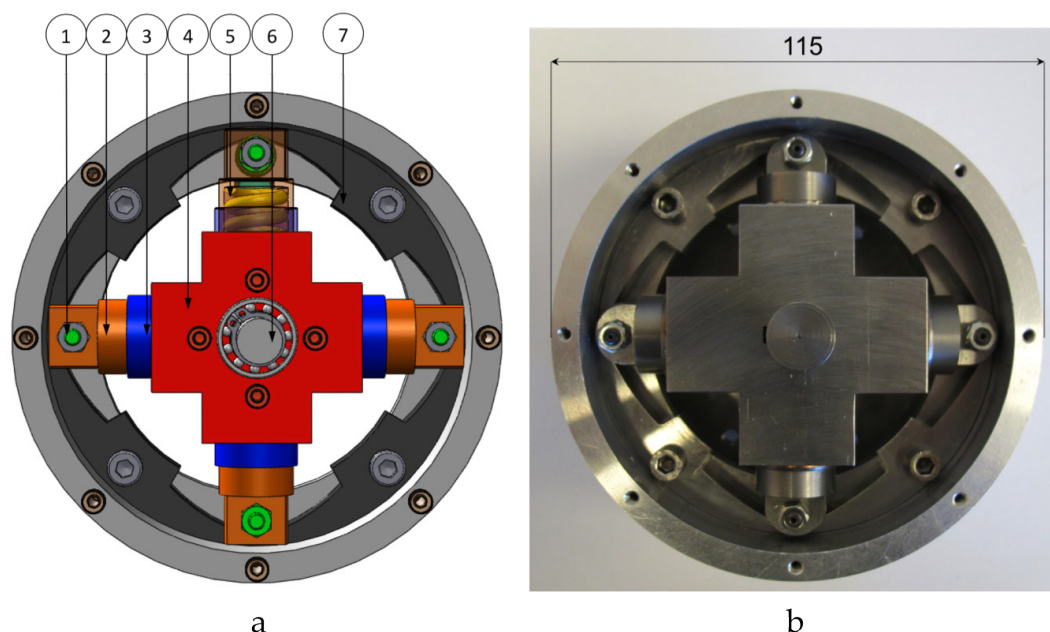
Stiffness module. (a) 3D CAD drawing of the torsional spring module (constant stiffness and 4-springs configuration is reported). 1: cam follower rollers, 2: rollers-springs connectors, 3: bushings, 4: central hub, 5: linear compression springs, 6: central shaft, 7: cam profiles. (b) Frontal view of the prototype highlighting the components of the torsional stiffness module with diameter dimension overlaid (mm).
